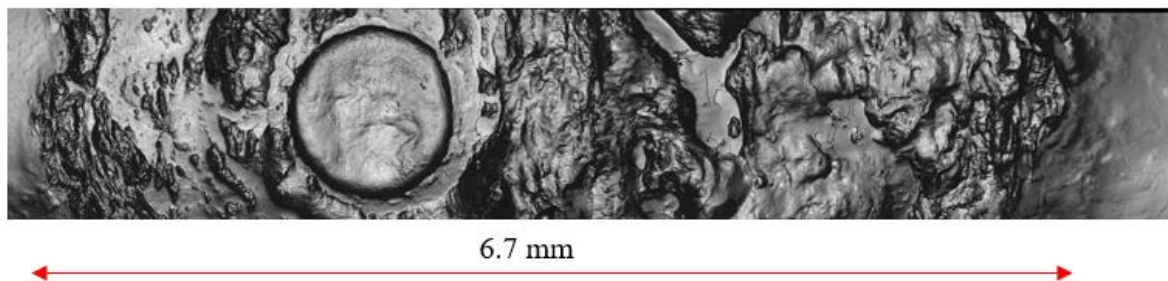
Mould image of the spalling area captured from the test bearing of run-to-failure experiment no. 3 [30]
